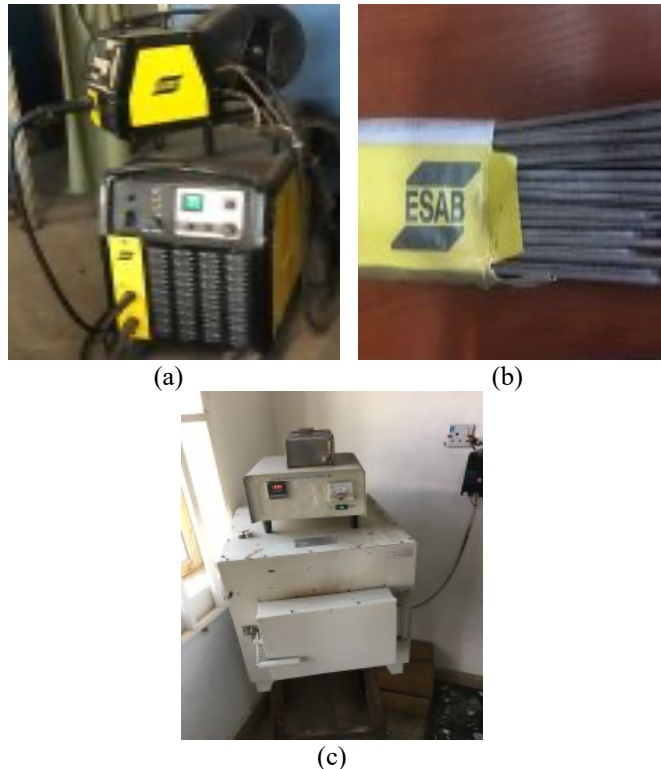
(a) Welding machine, (b) welding electrode and (c) muffle furnace
